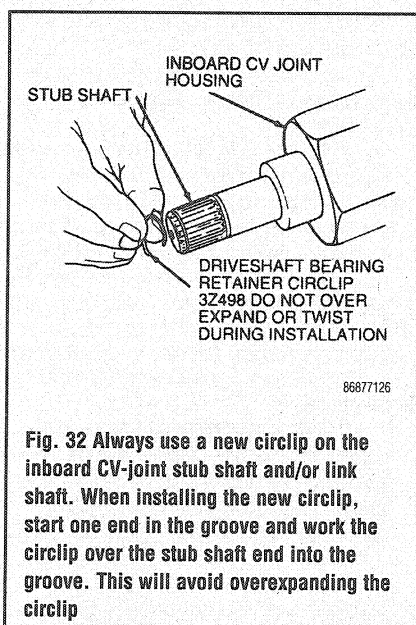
Always use a new circlip on the inboard CV-joint stub shaft and/or link shaft. When installing the new circlip, start one end in the groove and work the circlip over the stub shaft end into the groove. This will avoid overexpanding the circlip
